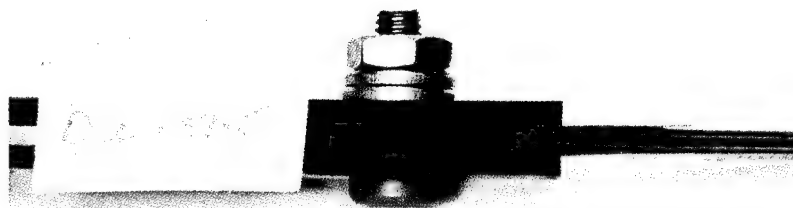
Typical Failure of Narrow DLC Specimen (Lay-Up No. 2)
